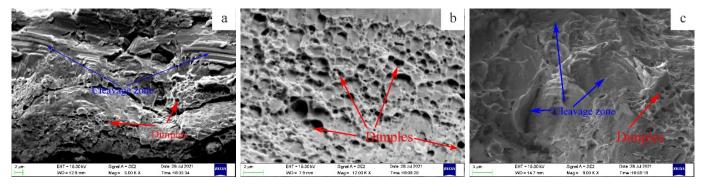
304 stainless steel foil fracture morphology: (a) 950°C, (b) 1050°C, (c) 1100°C
